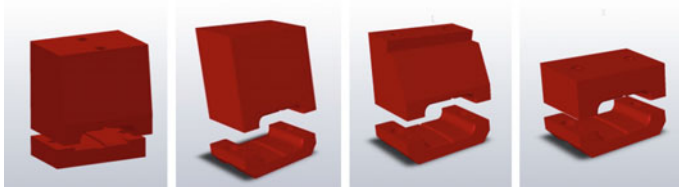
Shape sensor beam support structures (from left to right, the first is used to fixate the beam)
